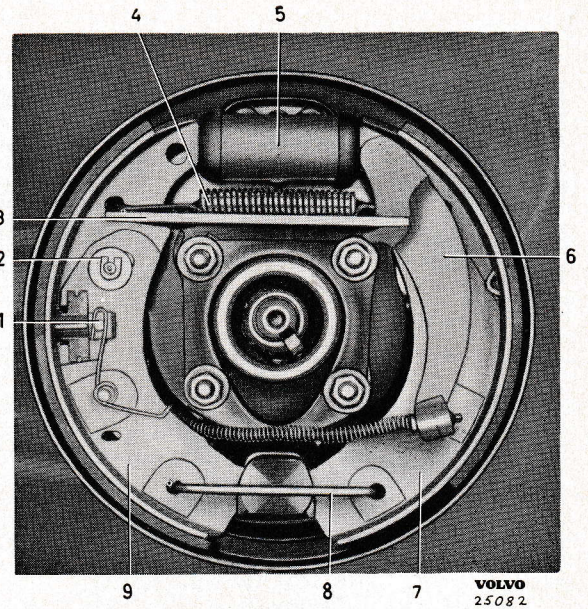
Wheel brake unit, early production, left-hand rear wheel.
